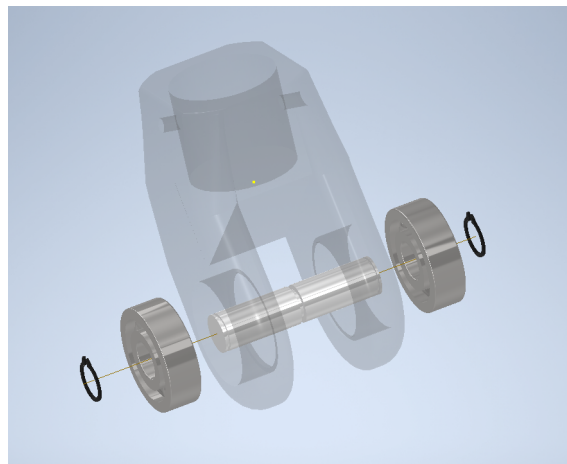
Exploded view of pin and bearing assembly for joint component.
